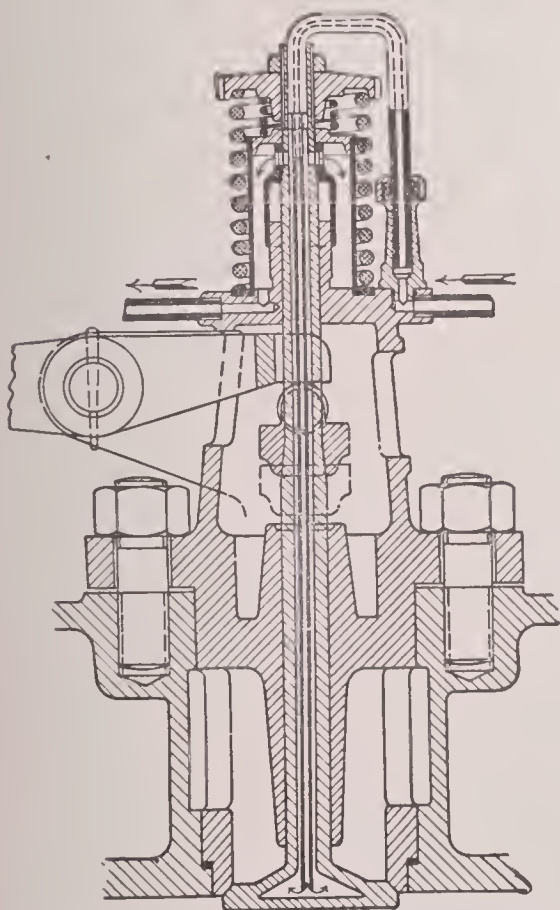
Exhaust Valve, Güldner Type with Pawlikowsky Method of Water Supply.
